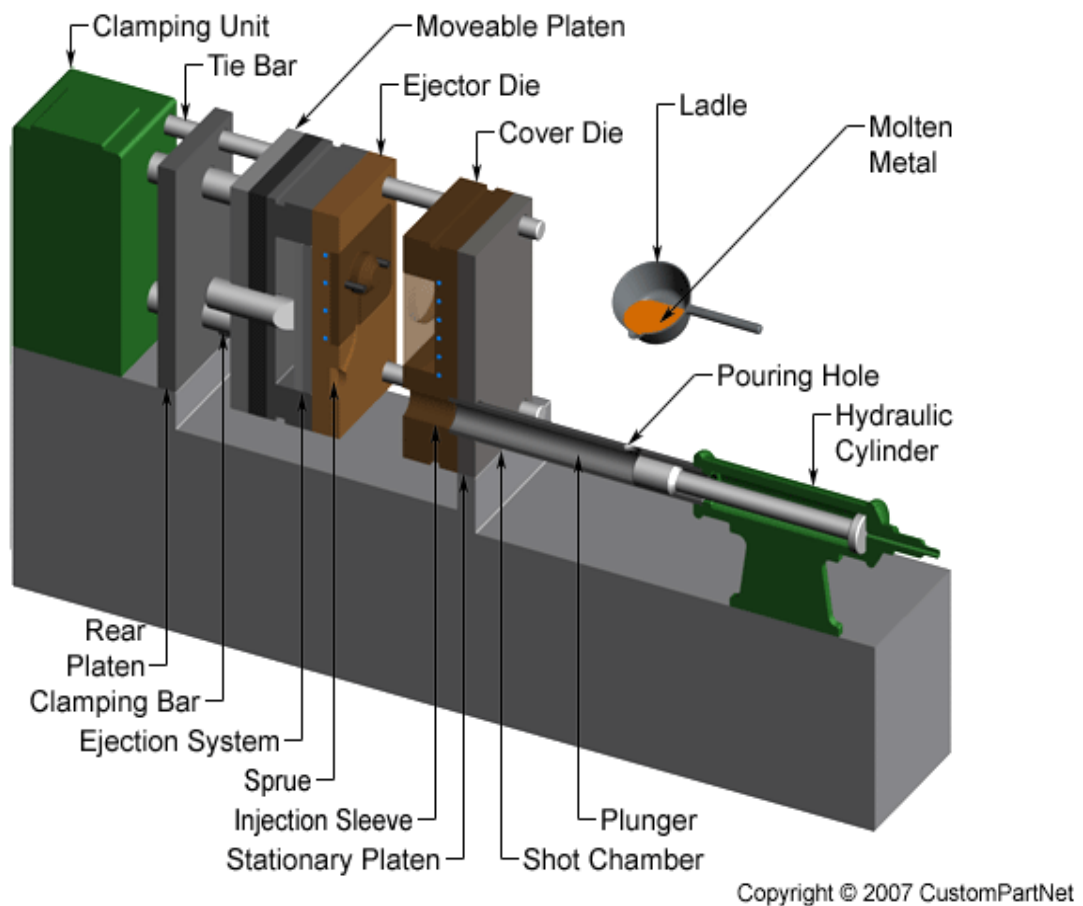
High pressure die casting machine (cold chamber die casting)
